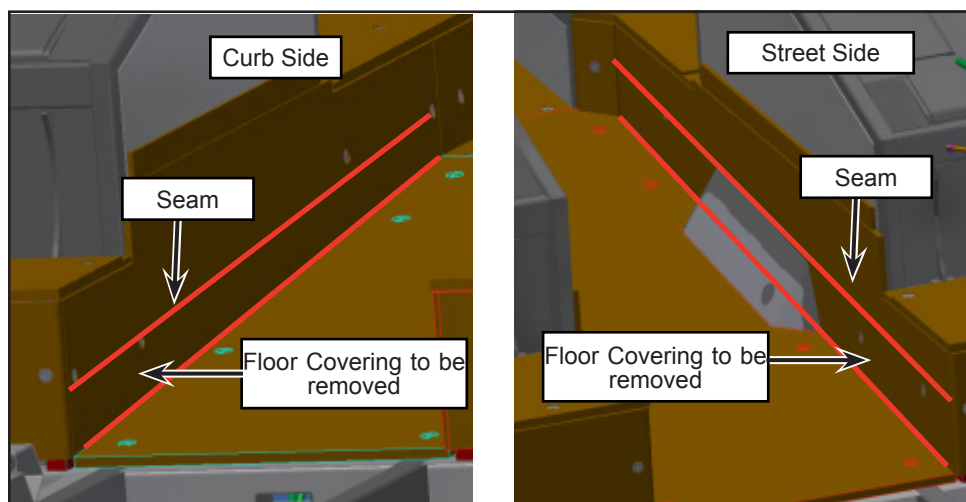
Removal of Plywood on Street Side and Curb Side wall
